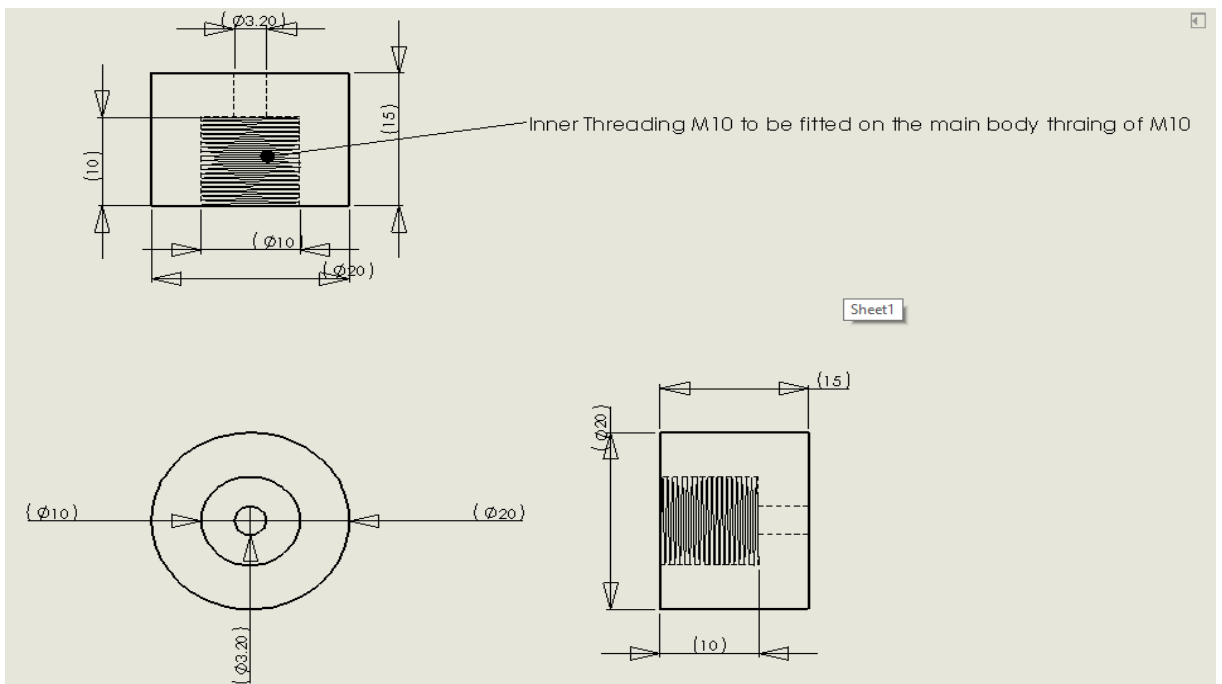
2-D schematic of the Squeezing part to hold the connector on the sample probe
